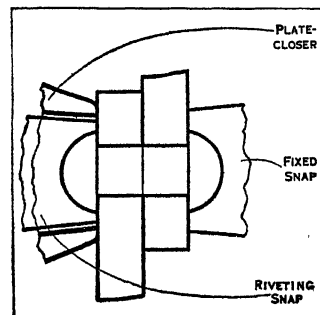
HOW THICK MARINE BOILER PLATES ARE SQUEEZED TOGETHER FOR RIVETING
